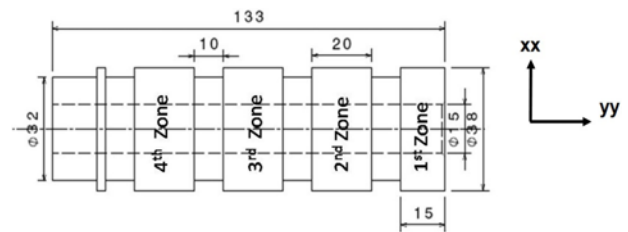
AISI 4140 workpiece prepared for combined turning-ball burnishing
